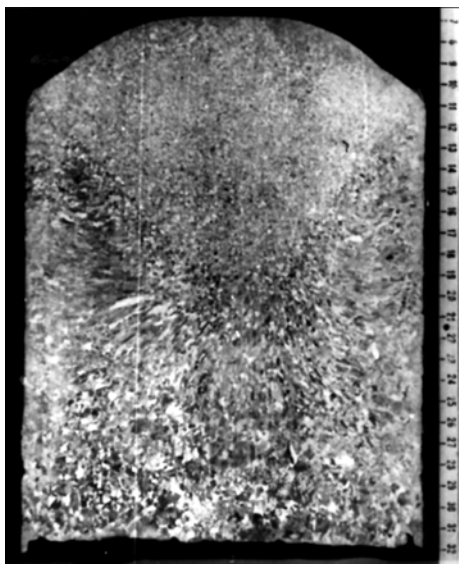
Macrostructure of head part of ingot melted with removal of shrinkage cavity
